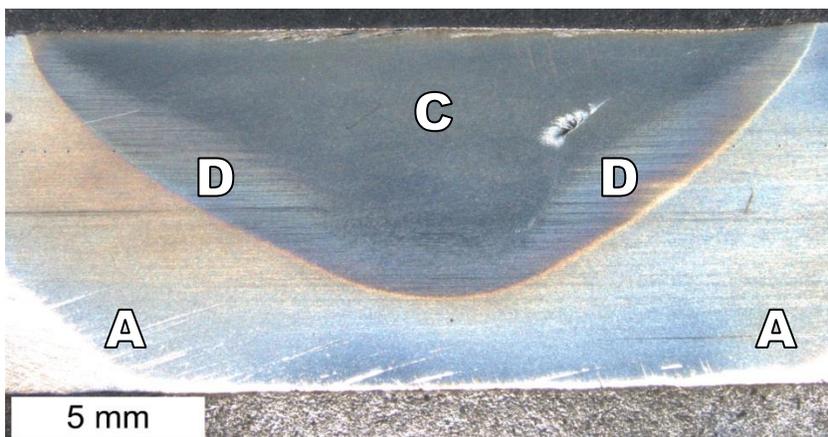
Bead on plate weld with different weld zones labeled.
